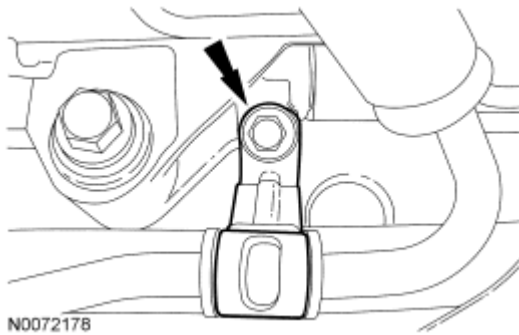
Identifying PSP Bracket-To-Steering Gear Bolt
